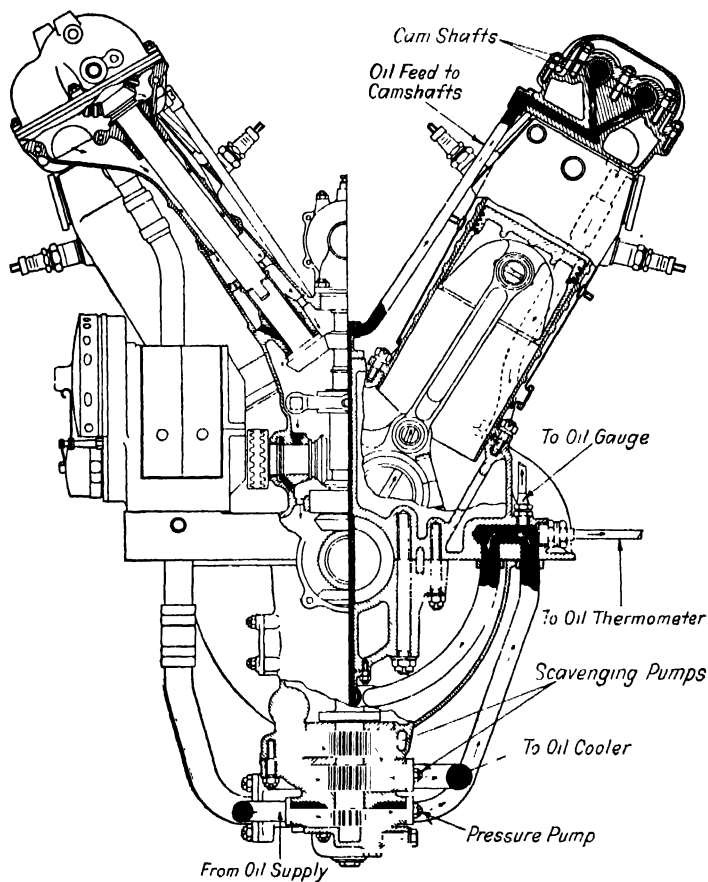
Transverse Sectional View of Fiat Aero Engine Showing Large Oil Passages and Three Section Gear Type Oil Circulating Pump.
